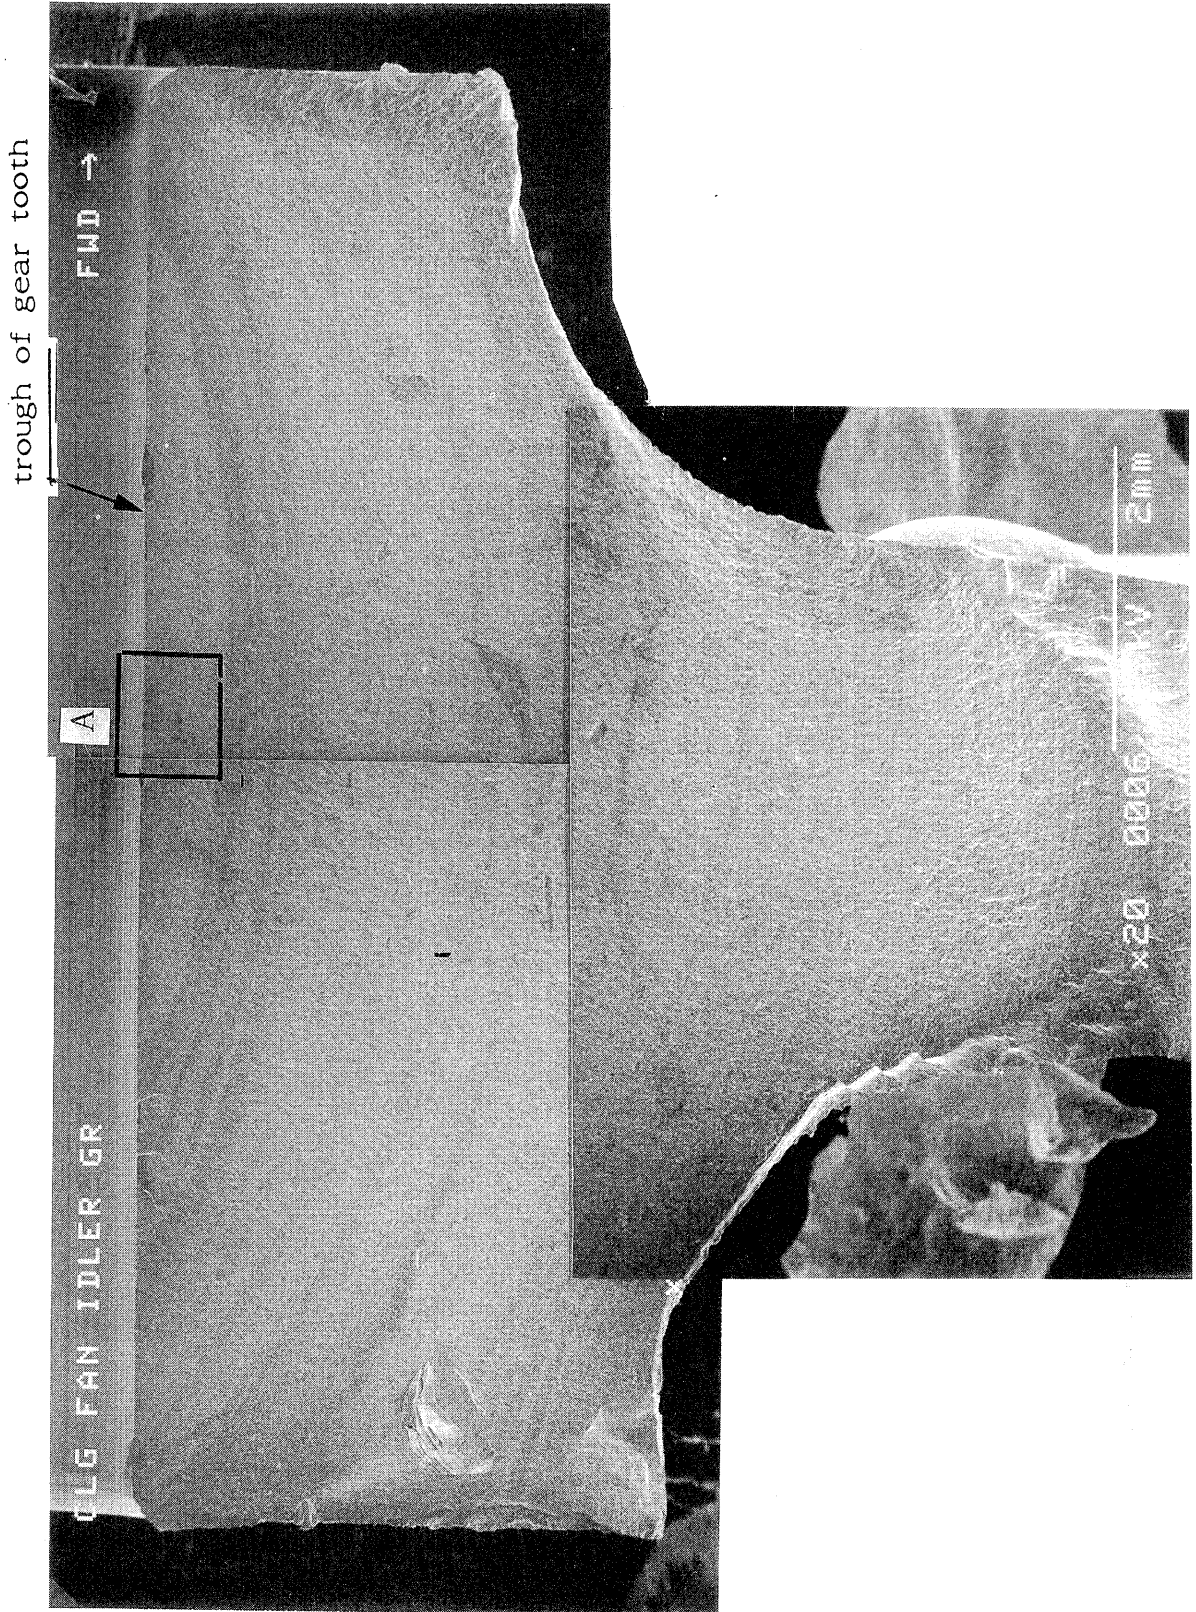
SEM View of Fractured Cooling Fan Idler Gear (Position A on Photo.9)
